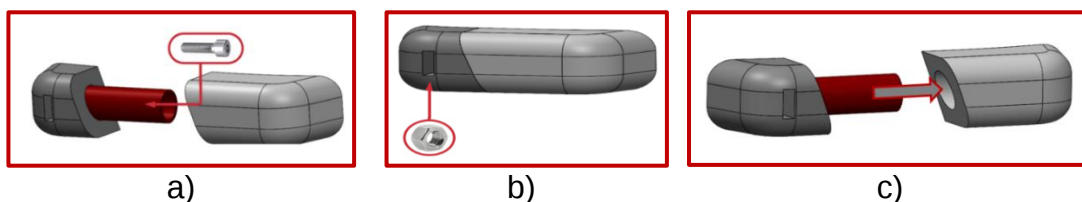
Multiple Figure of the function of each component used in the Cylindrical Guides: a) Assembly of the hexagon socket head cap screw M3 with the cylindrical component to one of the solid; b) Final assembly of the components with a M3 nut; c) Correct movement with the mechanism.
